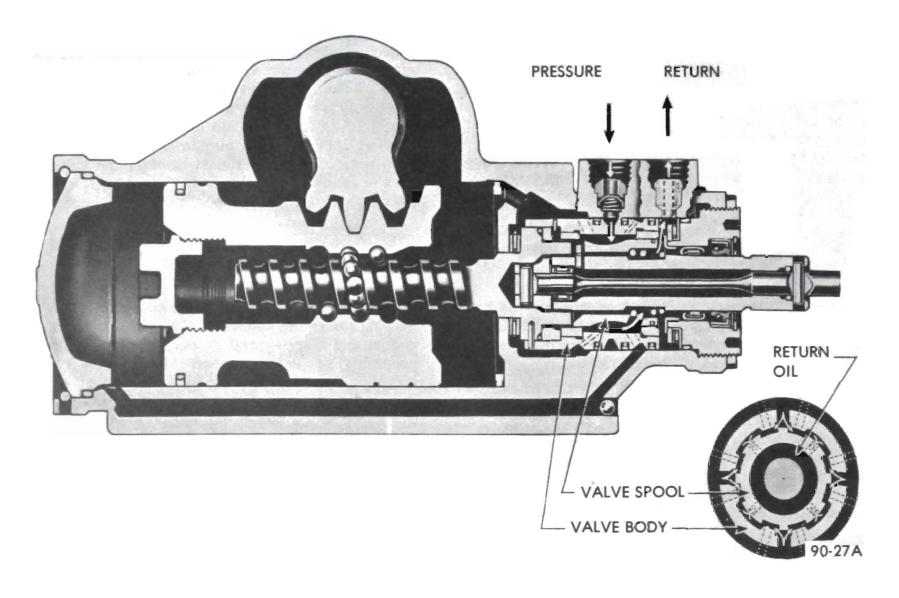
Oil Flow in Power Steering Gear (Straight-Ahead Position)
